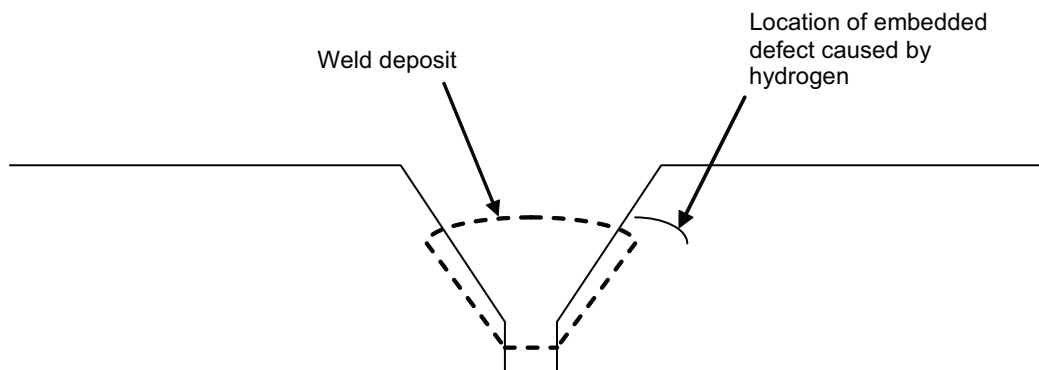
Possible Embedded Hydrogen Crack Caused by Interrupting Preheat on Partially Welded Seam without Postheat
